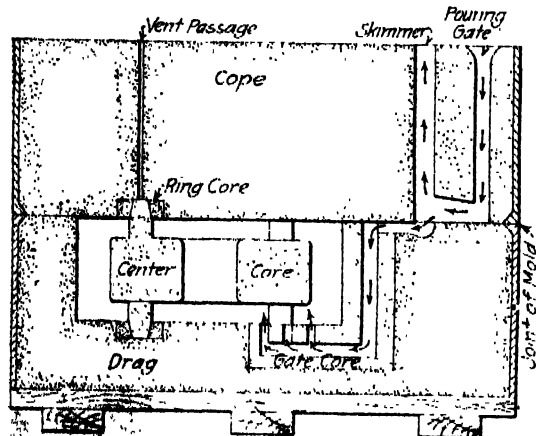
Cross Section of 12-In. Piston Mold on Standard Pattern Board
